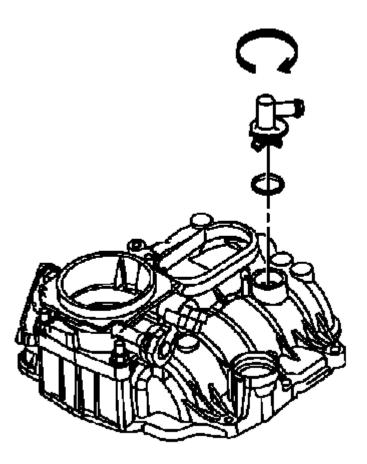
View Of Power Brake Booster Vacuum O-Ring Seal Courtesy of GENERAL MOTORS CORP.
